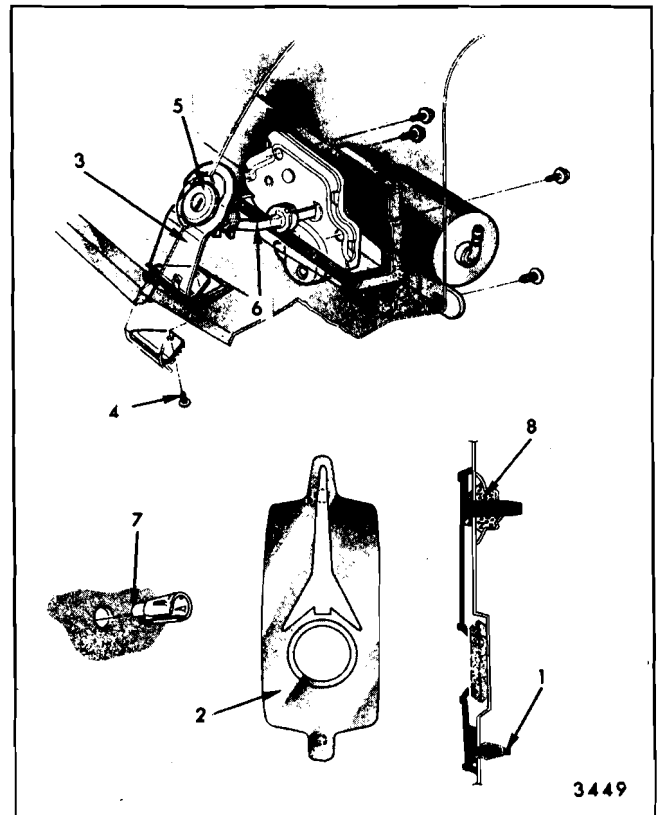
Rear Compartment Lock Cylinder and Emblem Assembly - Oldsmobile "B" Styles
